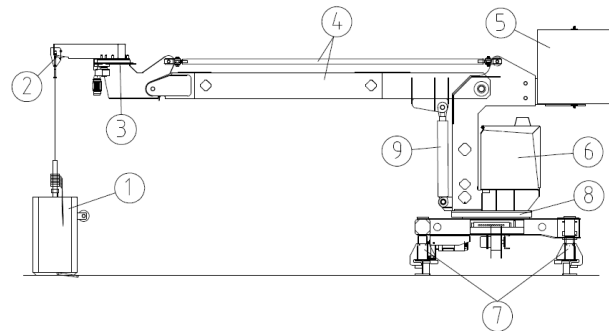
Design of a Suspended Access Equipment (drawn with AutoCAD)
